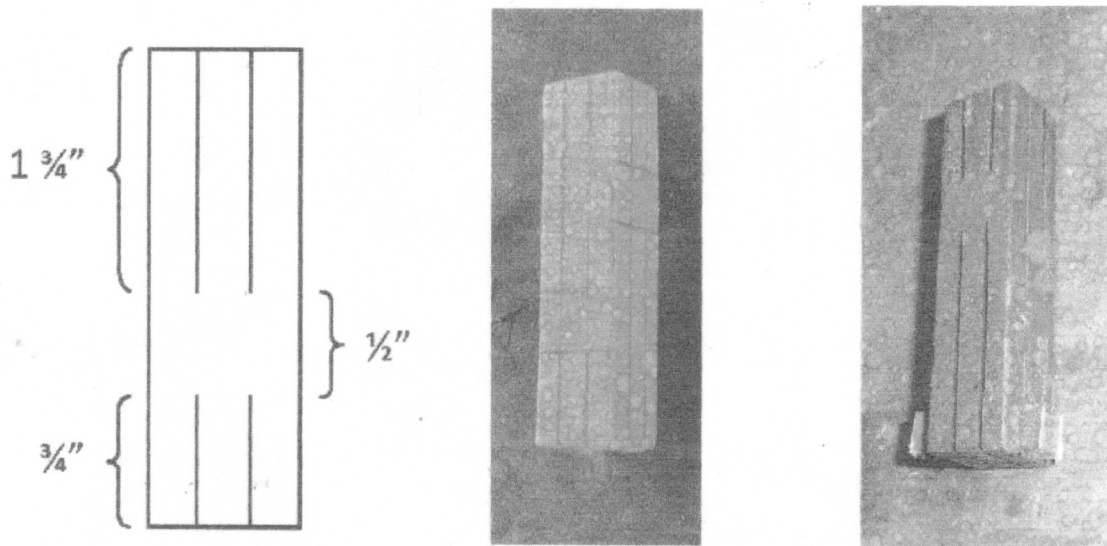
Cut layout (left), blank with marked cuts (center), cut blank with spacers (right)
